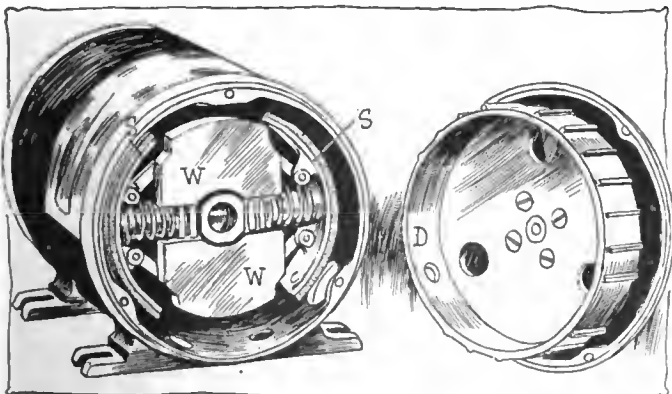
Gray & Davis governor regulator; S, friction surface; W, weights. Springs hold S against drum D until centrifugal force separates weights W and compress springs
